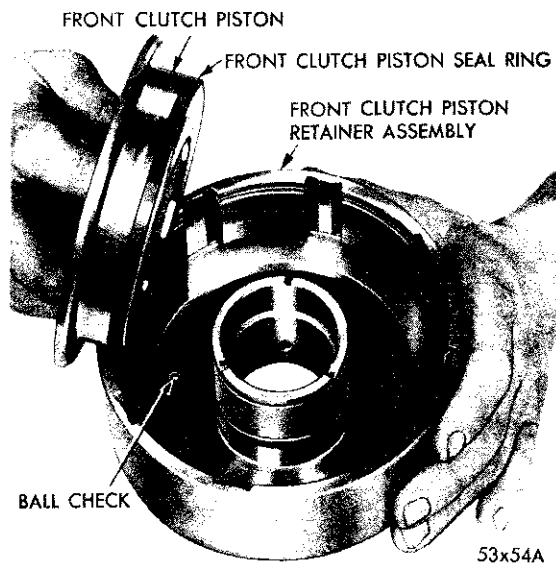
Removal and Installation of Front Clutch Piston Assembly
